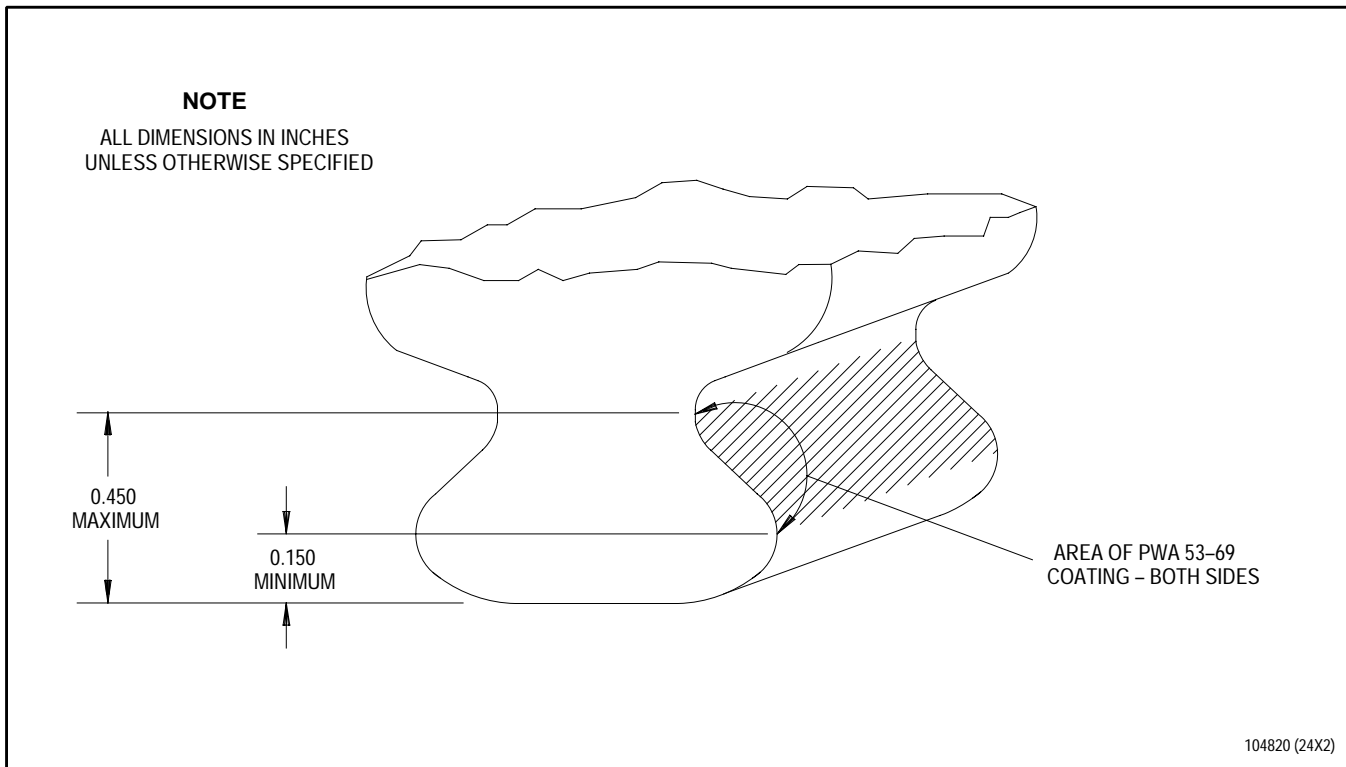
Compressor Rotor Blades (Stages One and Two) - PWA 53-69 Coating Area
